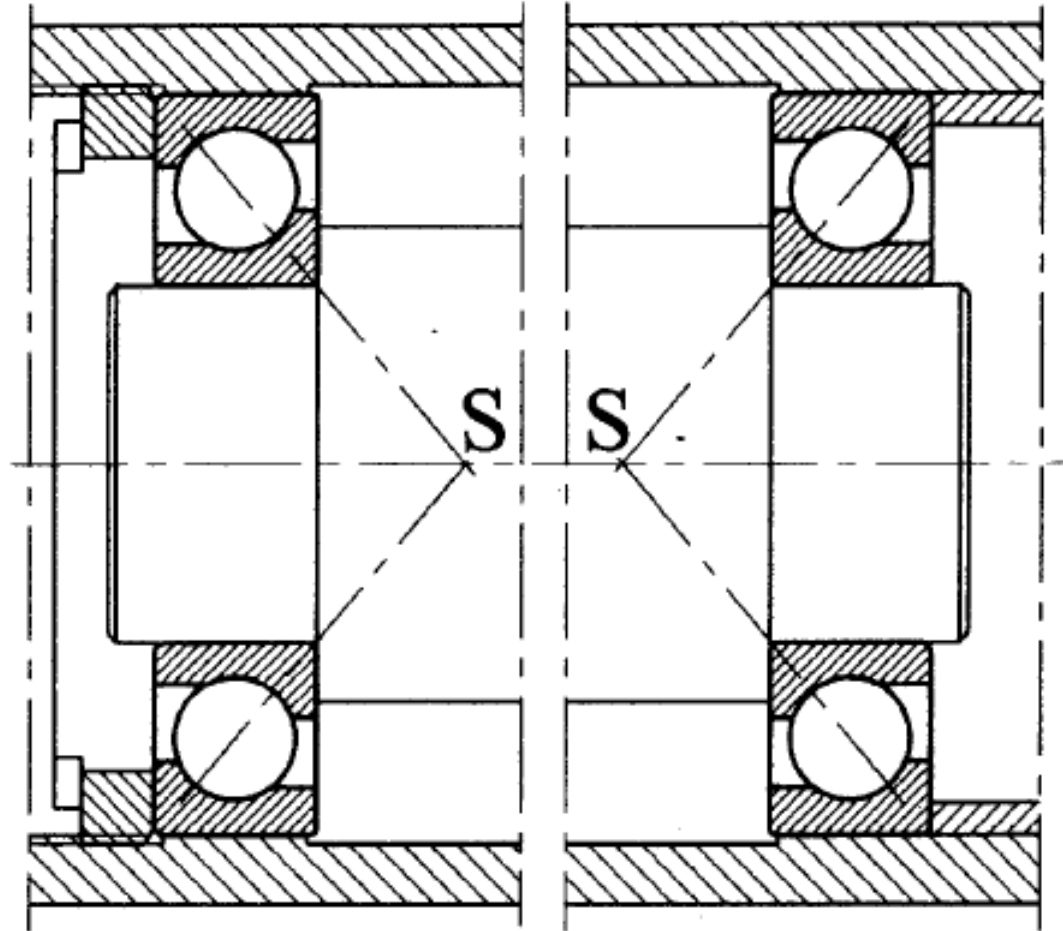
(a) Adjustable arrangement, apex points outside the two bearings. (b) Similar adjustable arrangement for angular contact bearings.
